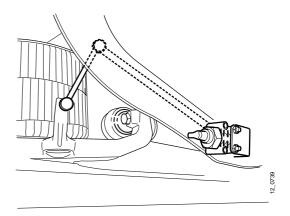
The front level sensor is located on the crossmember under the gearbox.
